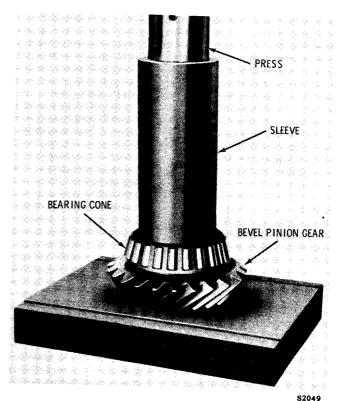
Installing pinion gear bearing (VH, VSI series)
